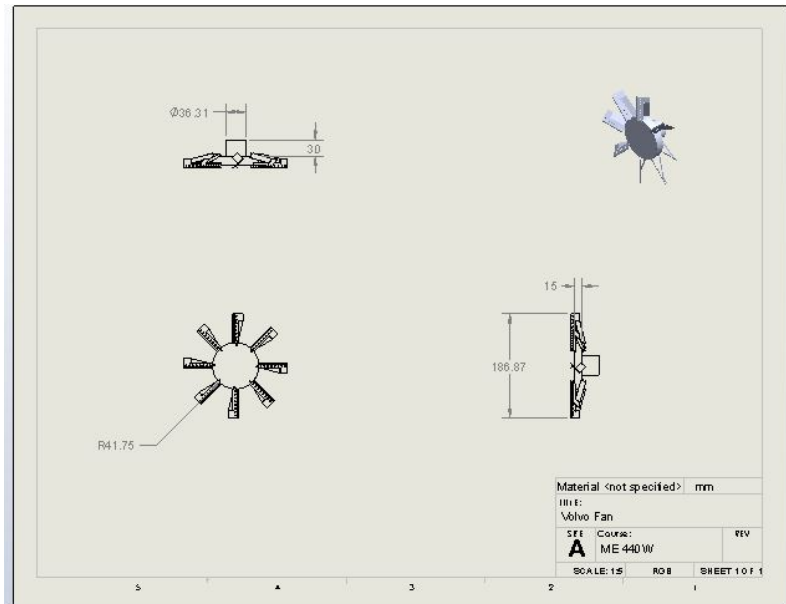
A drawing of the whole fan geometry with outer measurements shown to ensure the fan to fit inside the shroud
